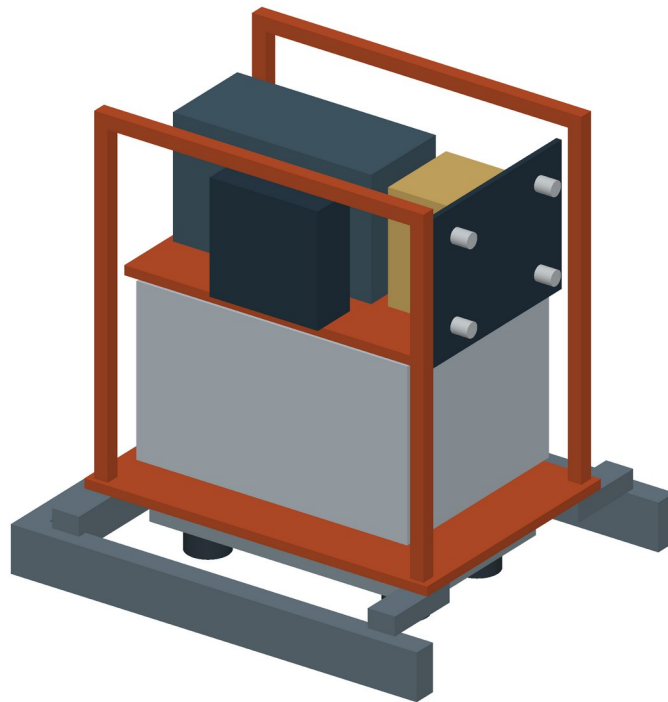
Original CAD envelope assembly. Orange is the removable cassette; grey is the fixed dock. Equipment, connectors and the lifting carrier are geometric reservations.
